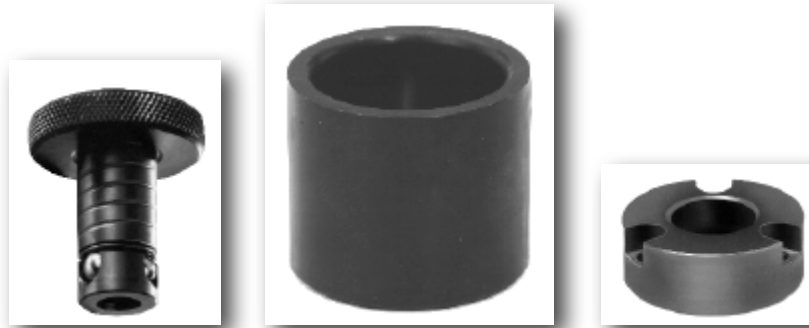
, 2.6, 2.7: Ball Lock Locating Shank, Linear Bushing, and Receiving Bushing.
